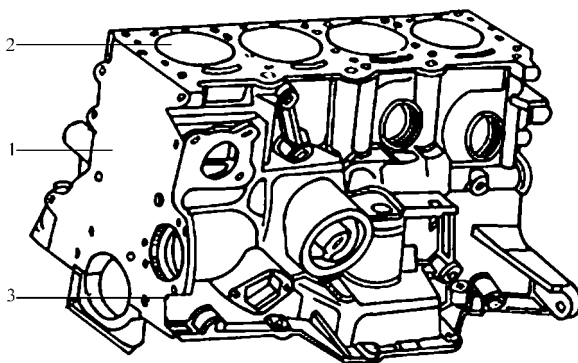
Four-Cylinder Engine Cylinder Block (四缸发动机汽缸体)
